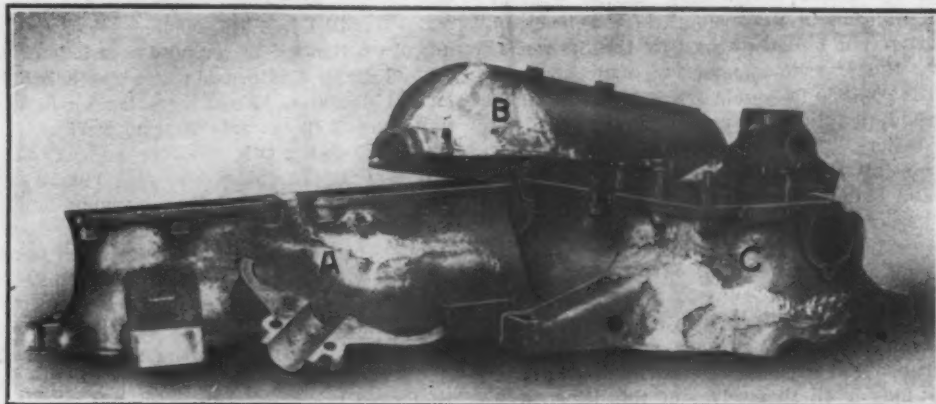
Three Cases Repaired by Autogenous Welding.
